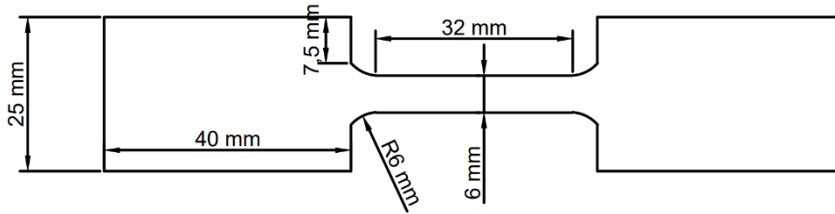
Geometry and dimensions of the tensile specimens used.
